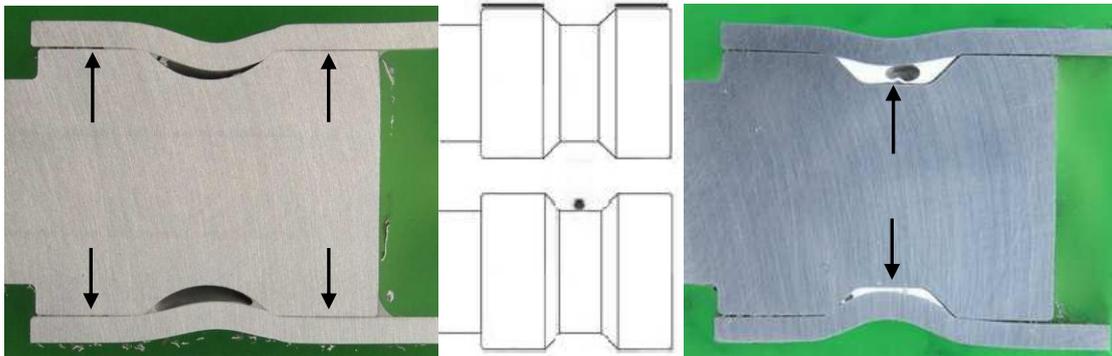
Cross sectioned EMP crimped joints sealed with adhesives [12].
